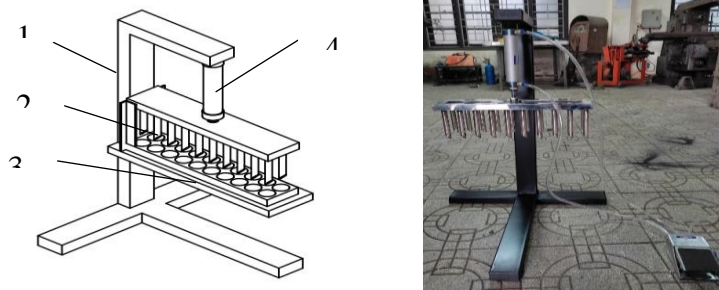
Design and prototype of the MTH-30 roselle seed separation machine 1. Machine frame, 2. Seed separation blade, 3. Flower feeding tray, 4. Pneumatic cylinder
